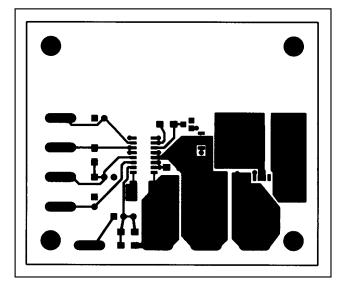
MAX797 EV Kit PC Board Layout—Component Side
